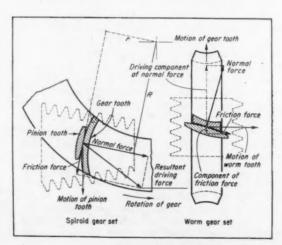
Mechanics of tooth engagement for Spiroid and worm gearsets.
